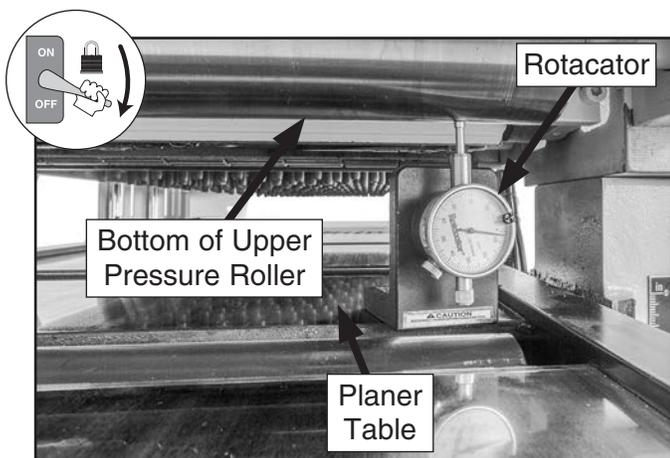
Rotacator placed underneath leftside of upper pressure roller.
